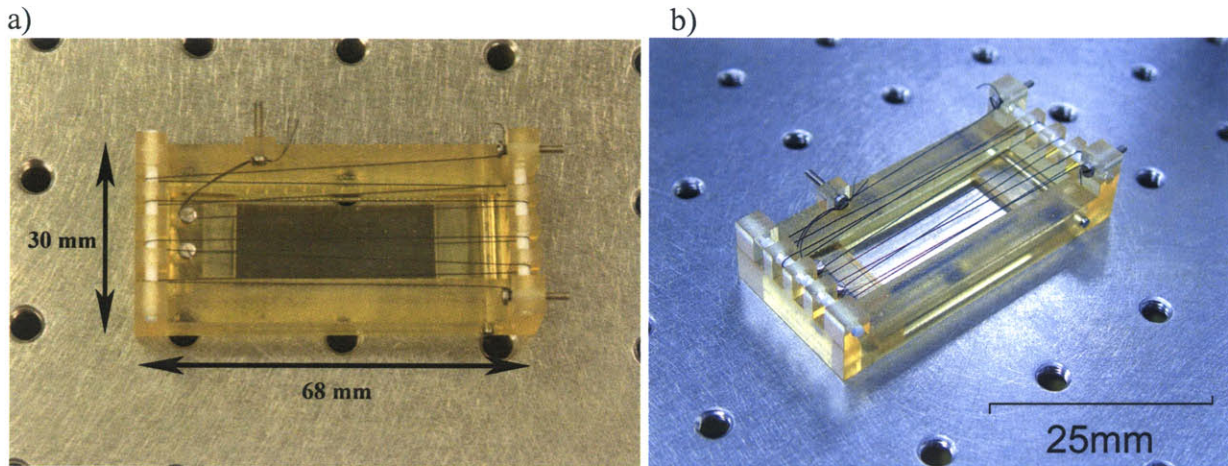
a) Top view of bowing shim prototype; b) Isometric view of bowing shim prototype.
